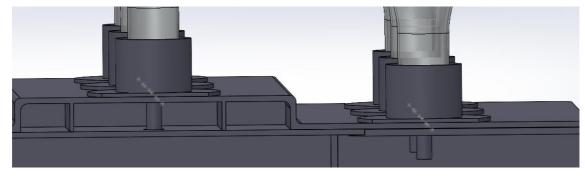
The bottle holder and bottle adapter connection with the main housing with screws.
